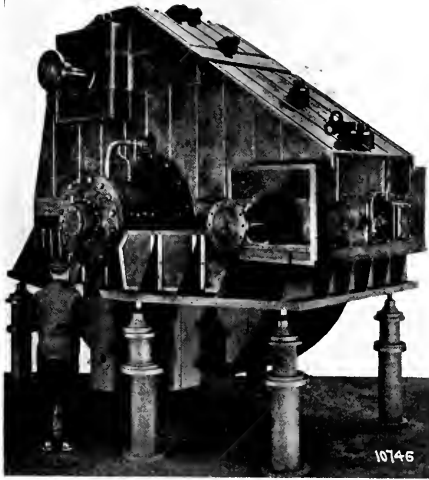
View of completed reduction gear showing pinion couplings and thrust bearings.
